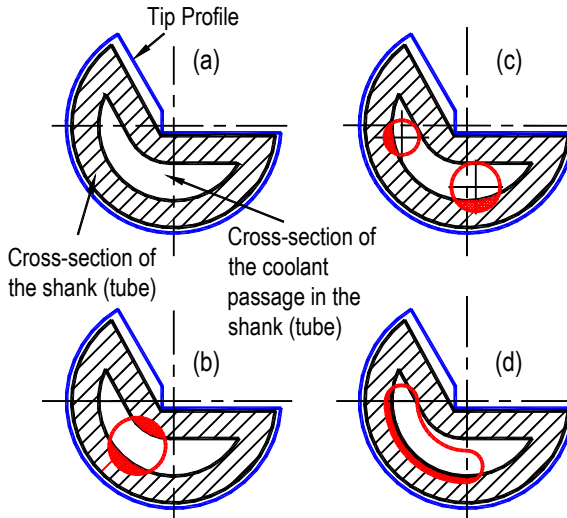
Different shapes of the coolant passage adopted by gundrill manufactures: one round hole, two round holes, and a kidney-shaped hole.
